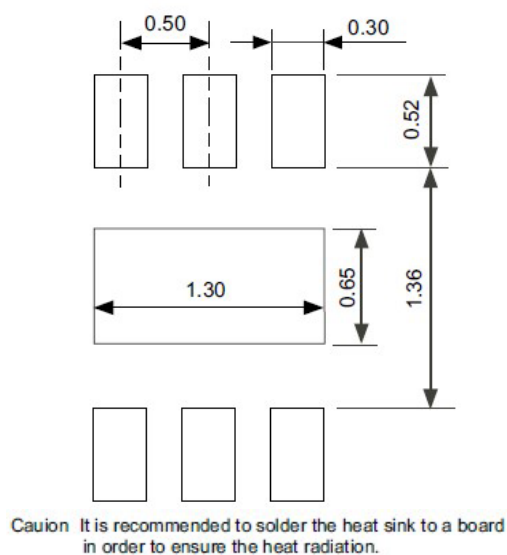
Heat Sink Section Stencil Opening Shape Example
